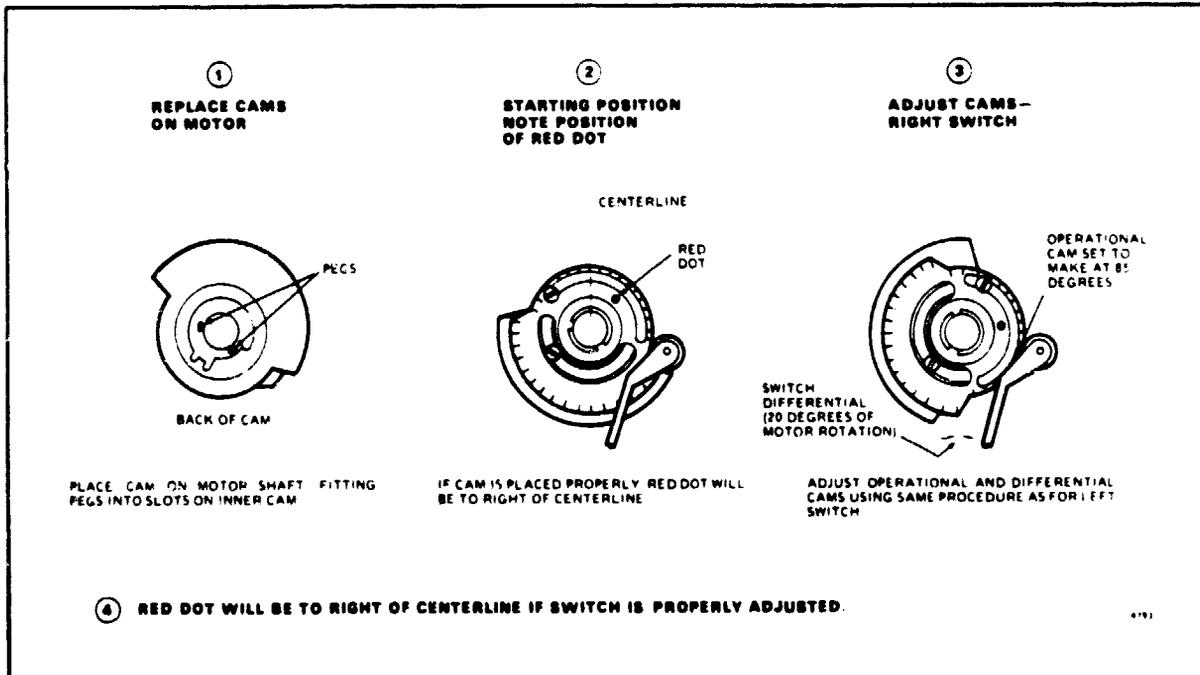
ADJUST MAKE AND BREAK POINTS OF RIGHT AUXILIARY SWITCH (M941D ONLY).
